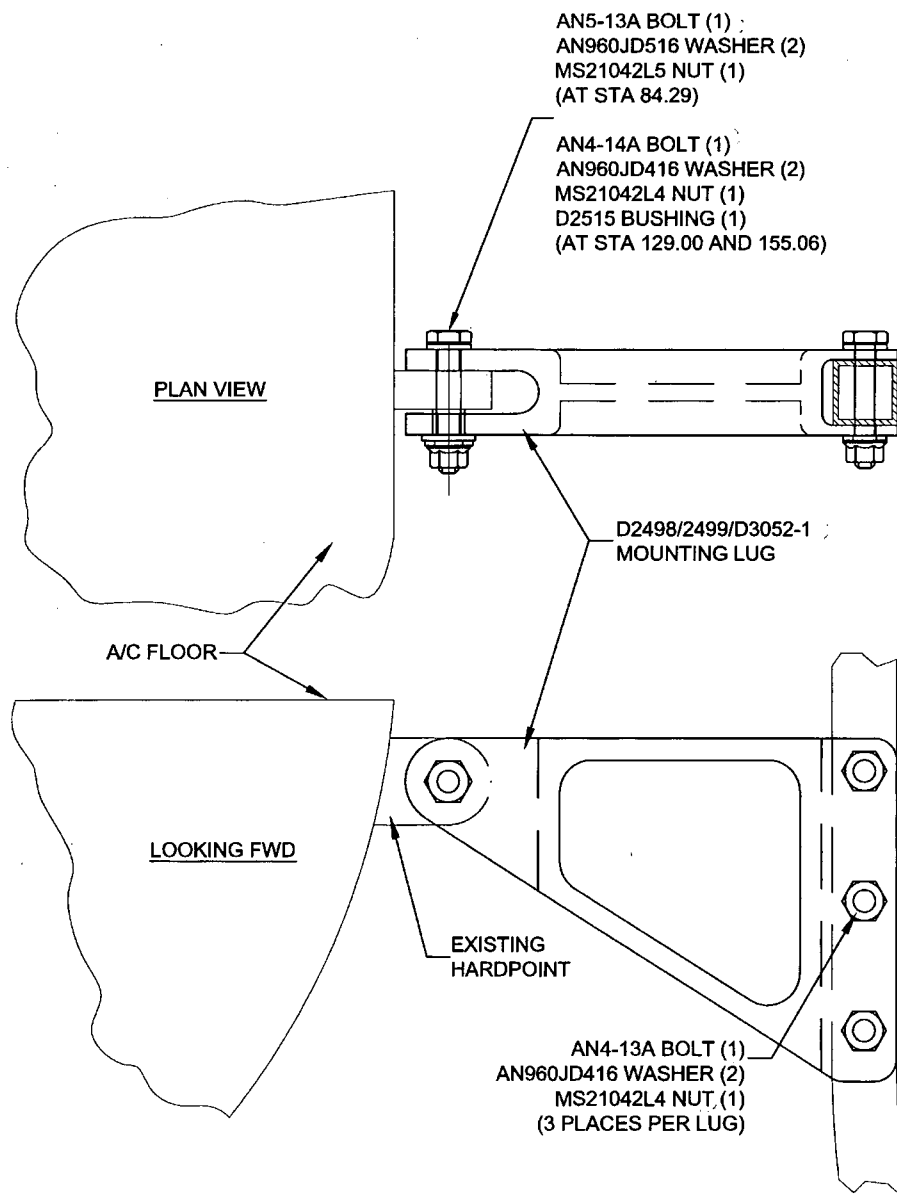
Section B-B Looking Fwd at STA 129.00
